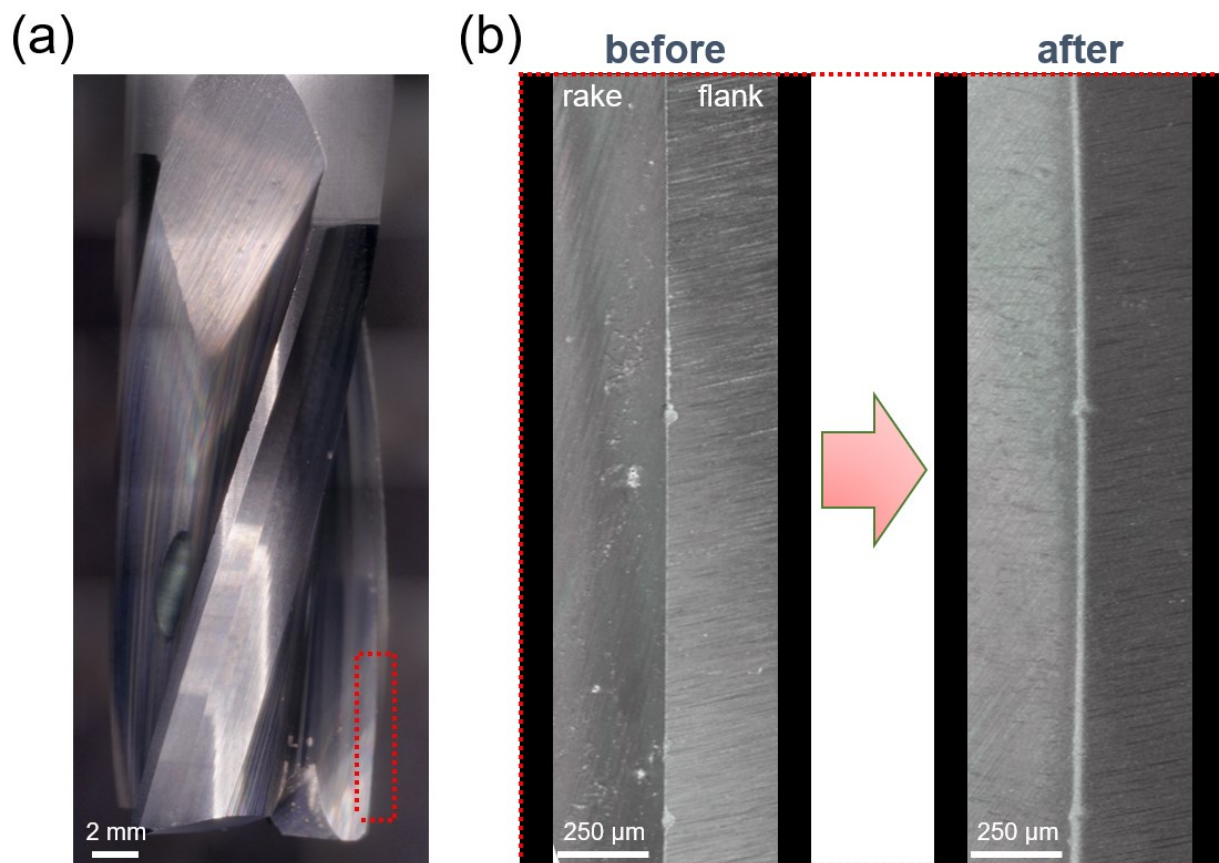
(a) Picture of Small Three-flute Helical End-mill (b) Before and After Honing of the Peripheral Cutting Edge.
